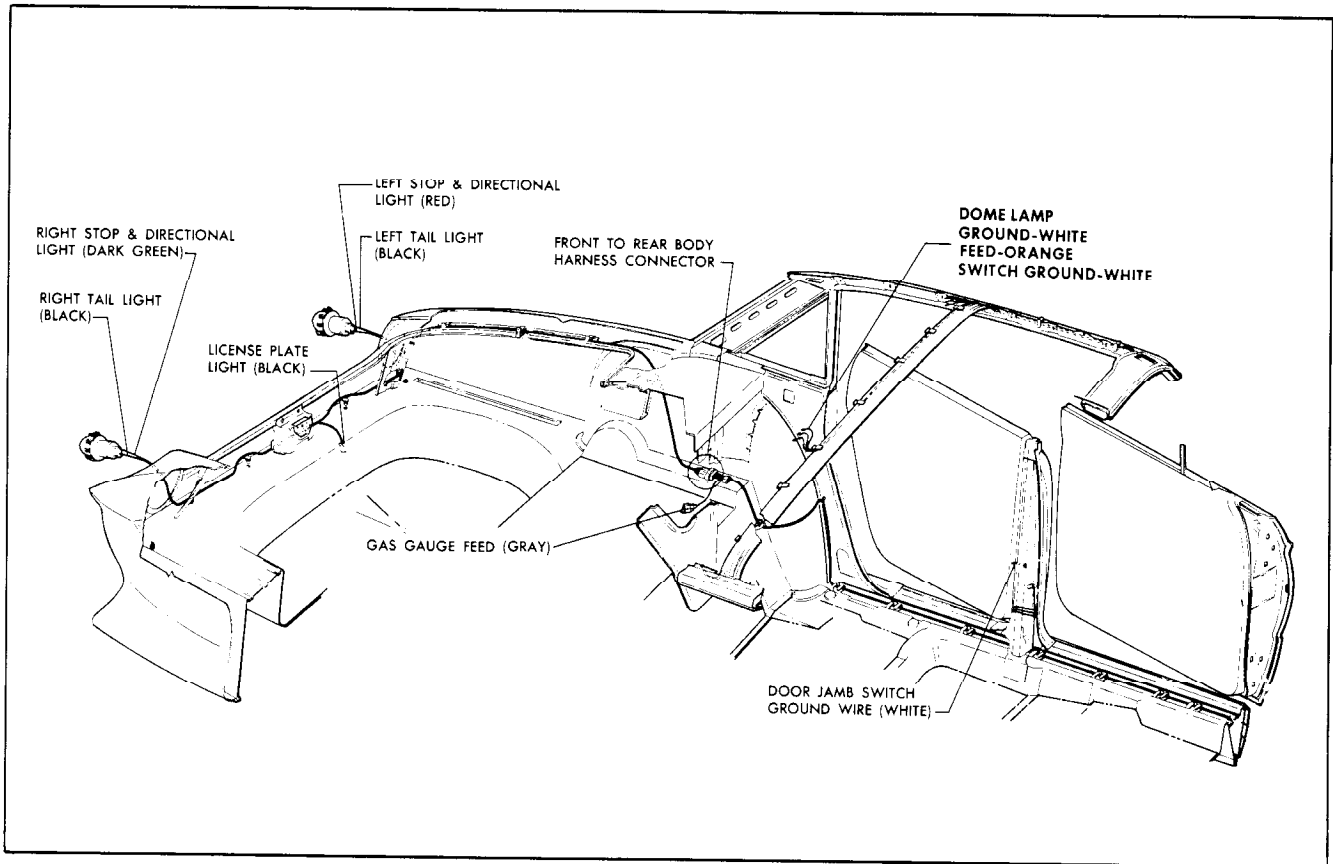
Rear Body Wiring (32 and 35 Series)
